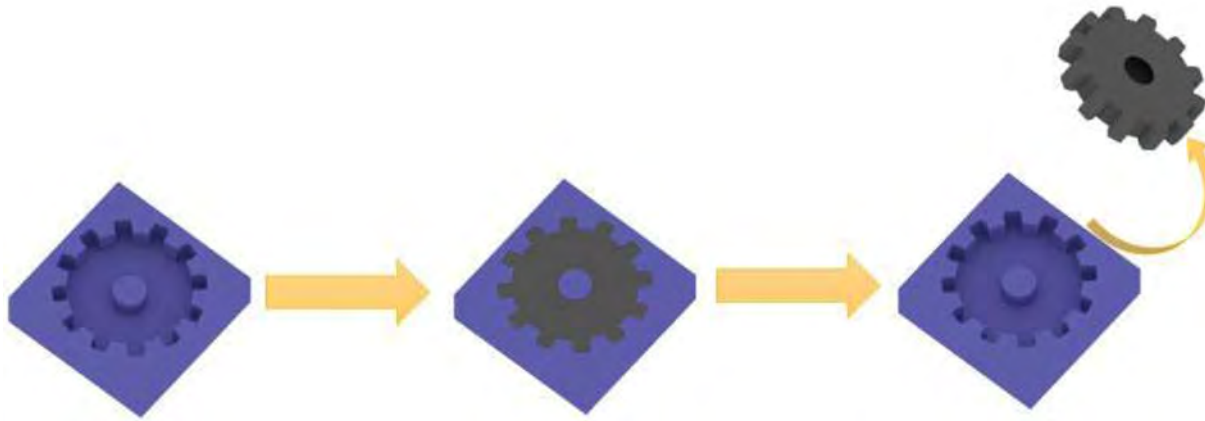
Reusable 3D-printed mold to cast thermosets filled with Bosch carbon.
